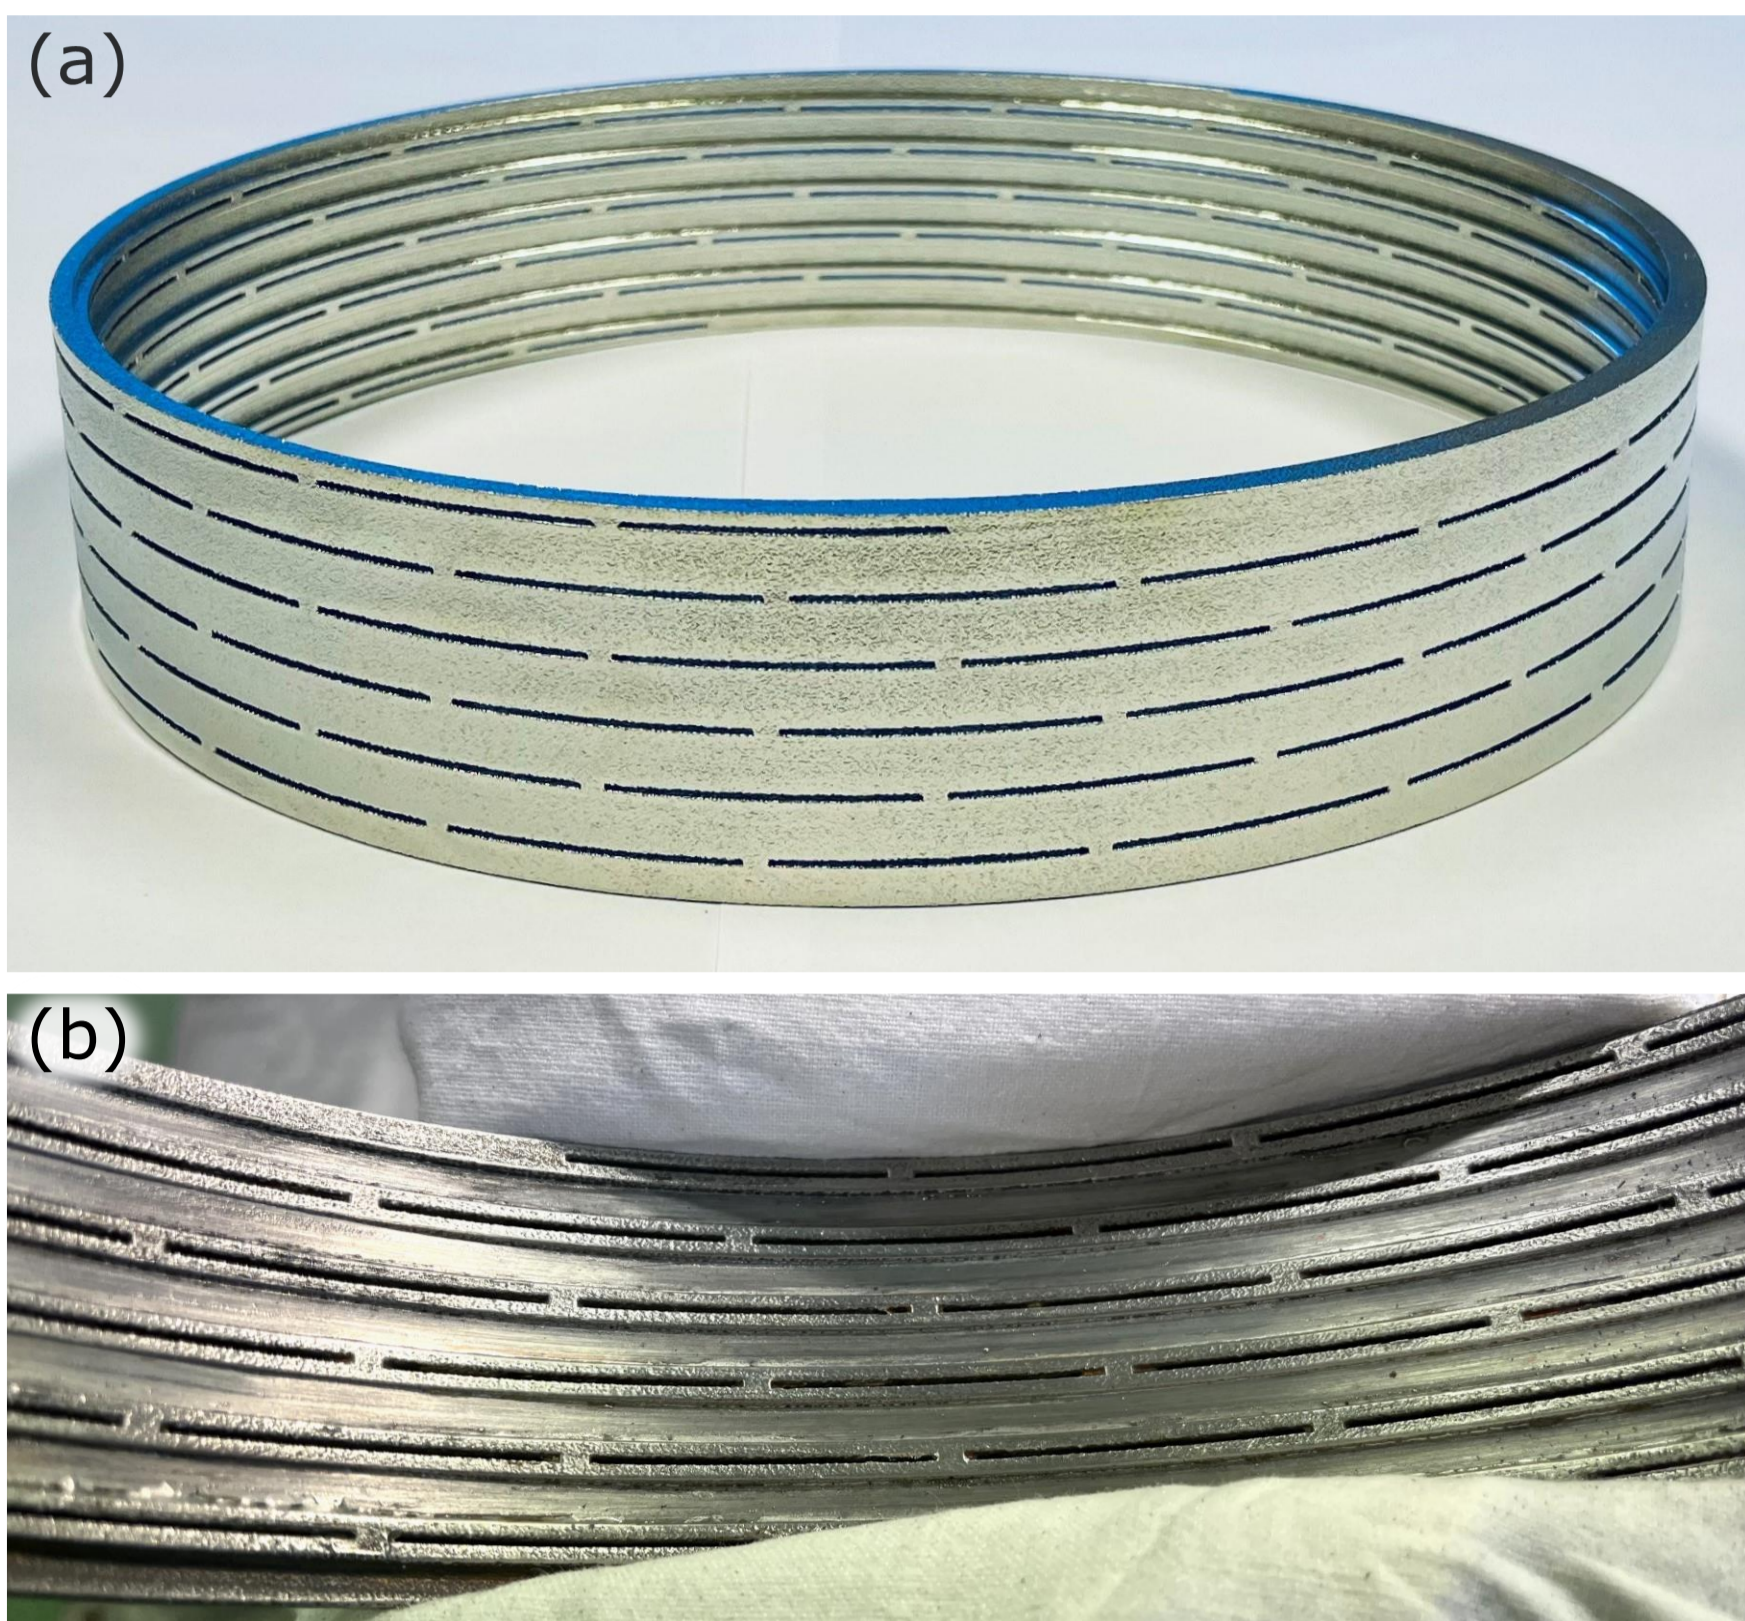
Demonstrator 1: Frontal - top view of the coated cylinder before soldering (a) and inside view of the coil after soldering of the HTS tapes (b).
